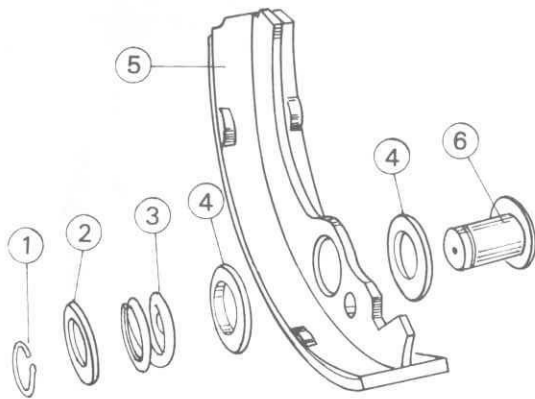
4 A brake shoe with the parts of the self-adjusting device
